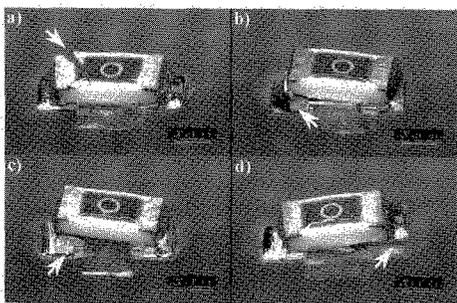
Fracture patterns of 1608R joints after shear test: (a) cracking inside a chip (F1), (b) a chip/solder interface (F2), (c) inside solder (F3), and (d) Cu land/substrate interface (F4).
